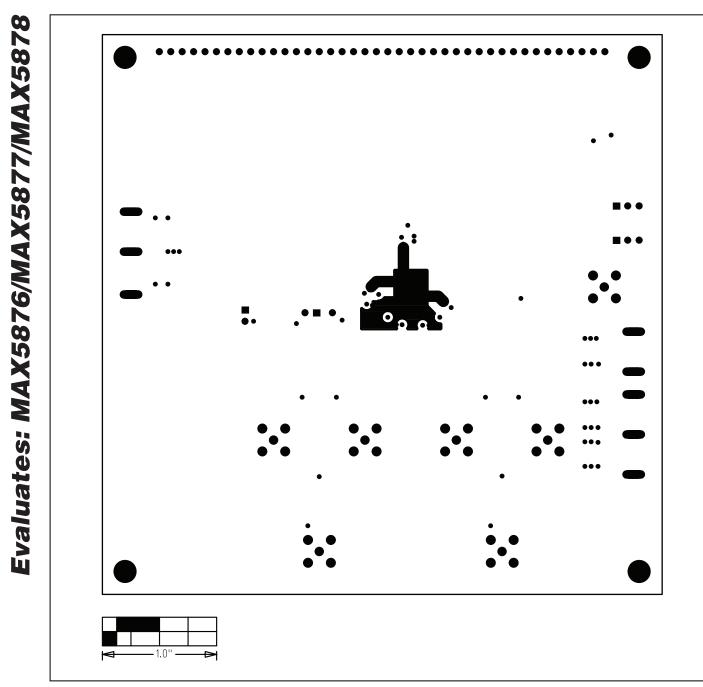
MAX5878 EV Kit PC Board Layout—Solder Side (Layer 4)
